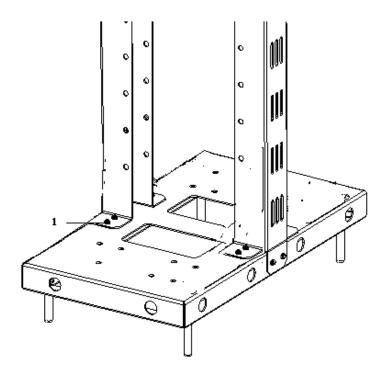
ZXSDR R8860Indoor Gantry-mount Installation Appearance (only RRU installed)
